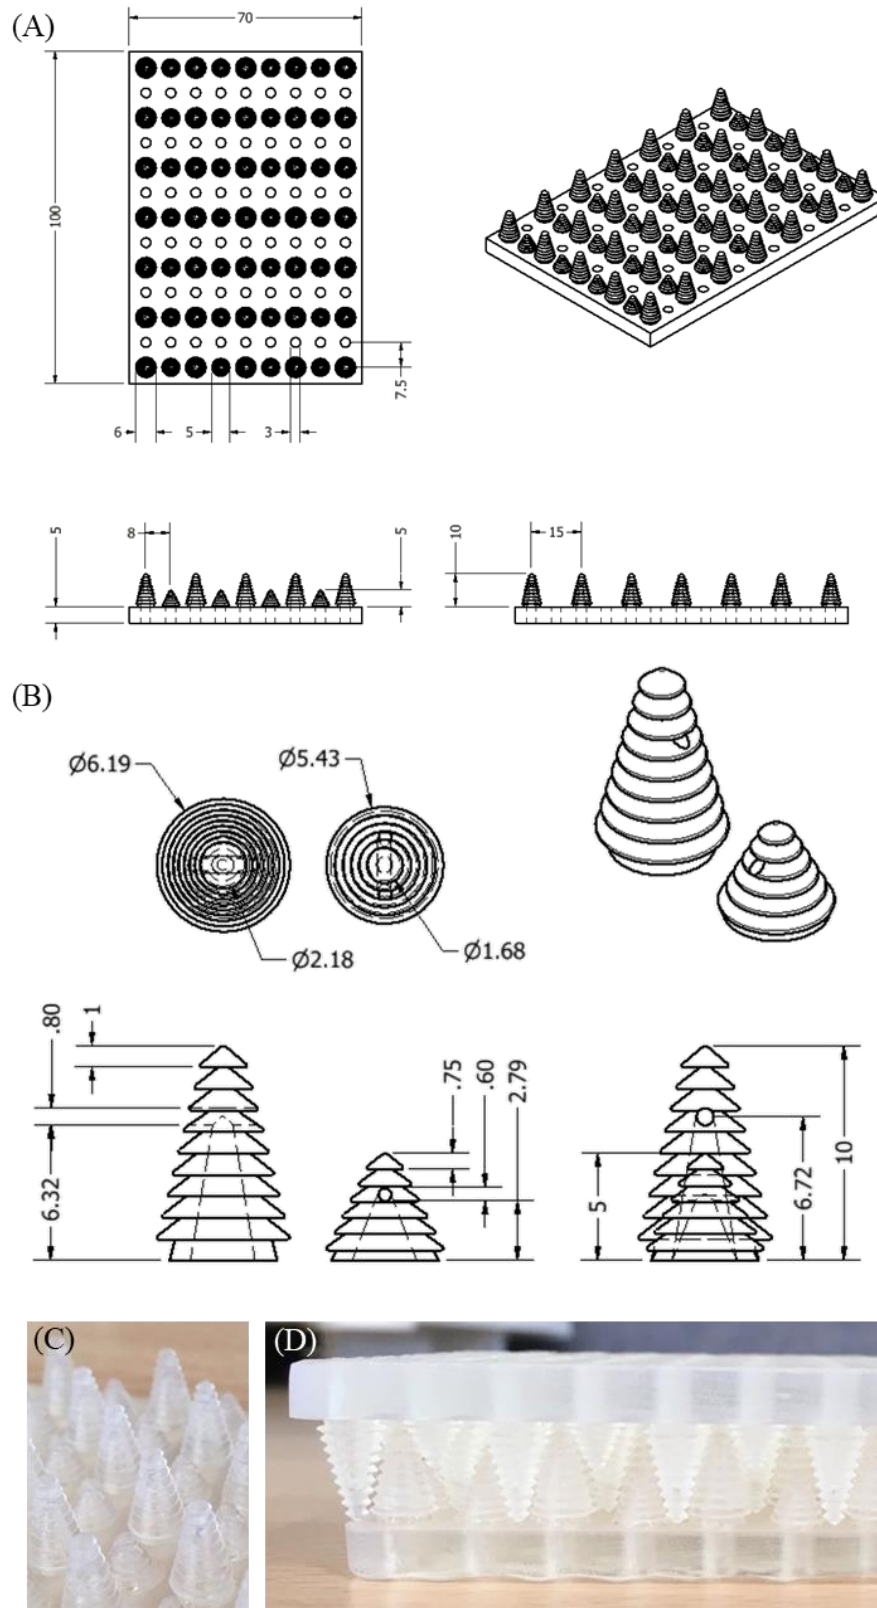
Improved second design of mastication plate. (A): Engineering drawing of the improved design of the mastication plate; (B): engineering drawing of the spikes; (C): 3D-printed mastication plate; (D): 'biting' of the plates. All measurement was made in mm.
